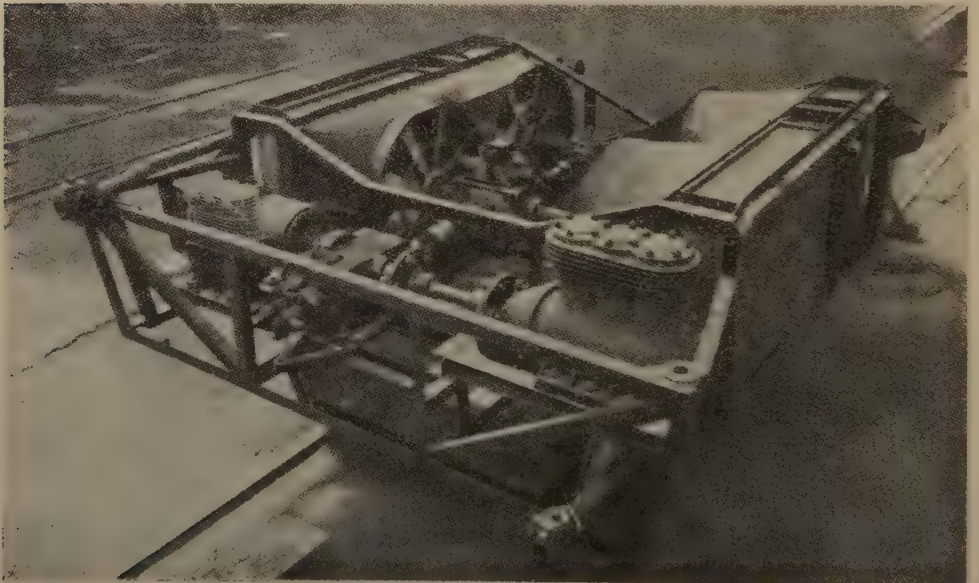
Arrangement of auxiliaries on subframe showing the Freon condenser for the air-conditioning apparatus at the end of the engine radiators, the two fans on each side being common to both. The air-conditioning compressor is in the right foreground, the auxiliaries gearbox in the middle foreground, and the brake compressor and lighting dynamo at the left.
